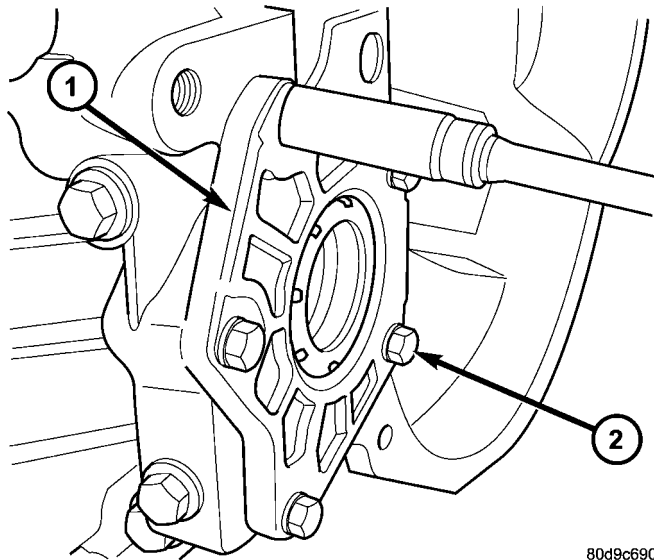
Axle Seal Removal (Bearing Plate Side)
